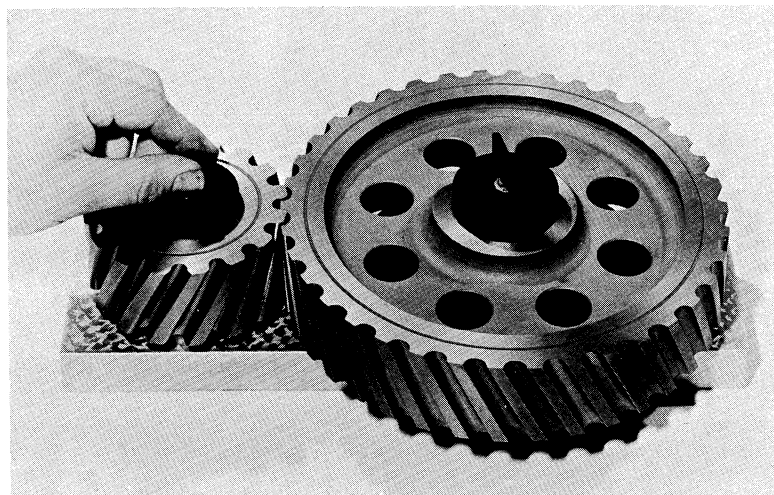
Circular-arc gears are reputed to carry from three to five times the tooth flank loading of gears with involute tooth shapes. They are also said to retain up to 10 times the thickness of oil film compared with involute teeth.
